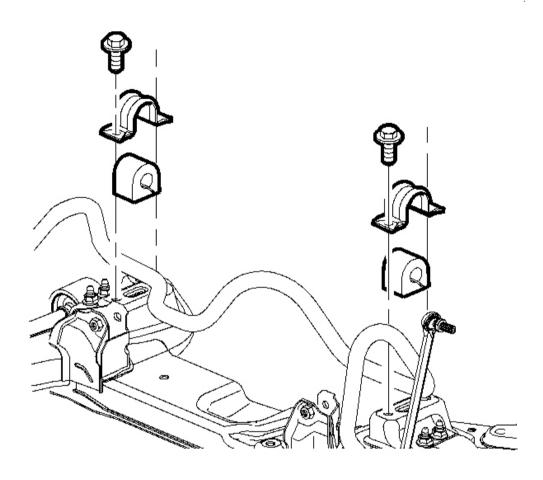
Stabilizer Bar Clamp & Cradle Bolts Courtesy of GENERAL MOTORS CORP.
